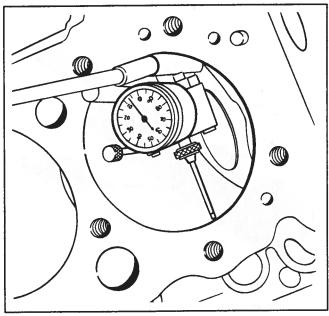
Using Dial Indicator To Check For Cylinder Taper And Out-Of-Round
